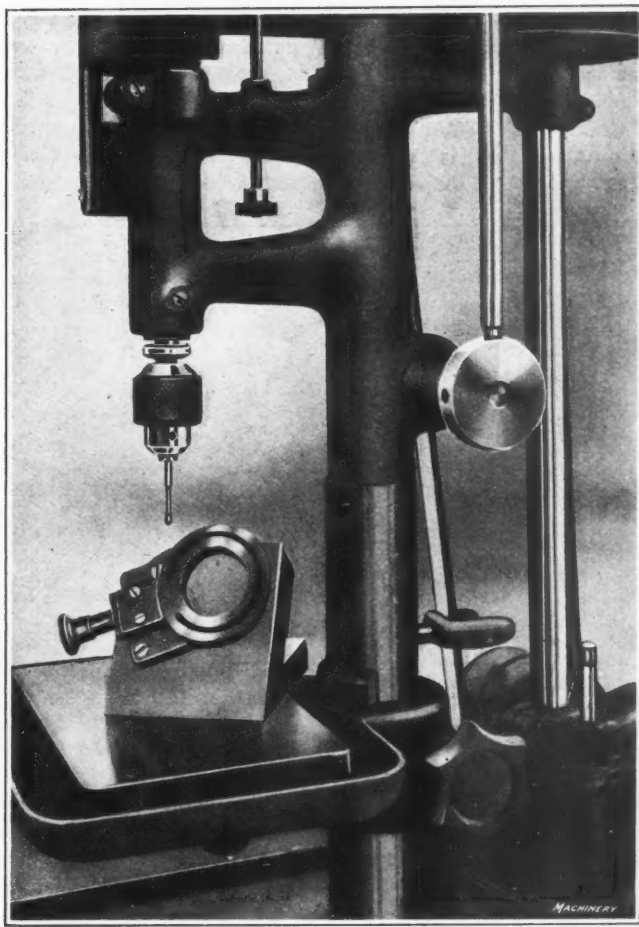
High-speed Machine for drilling and reaming Connecting Hole
